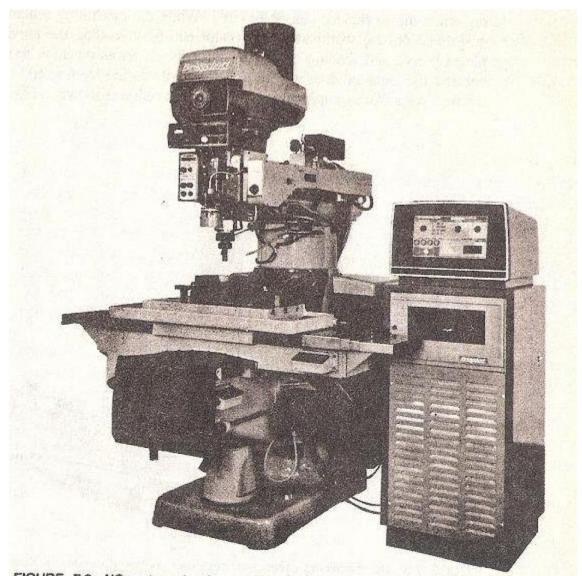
NC system showing machine tool and controller. (Courtesy of Bridgeport Machines Division of Textron Inc.)
